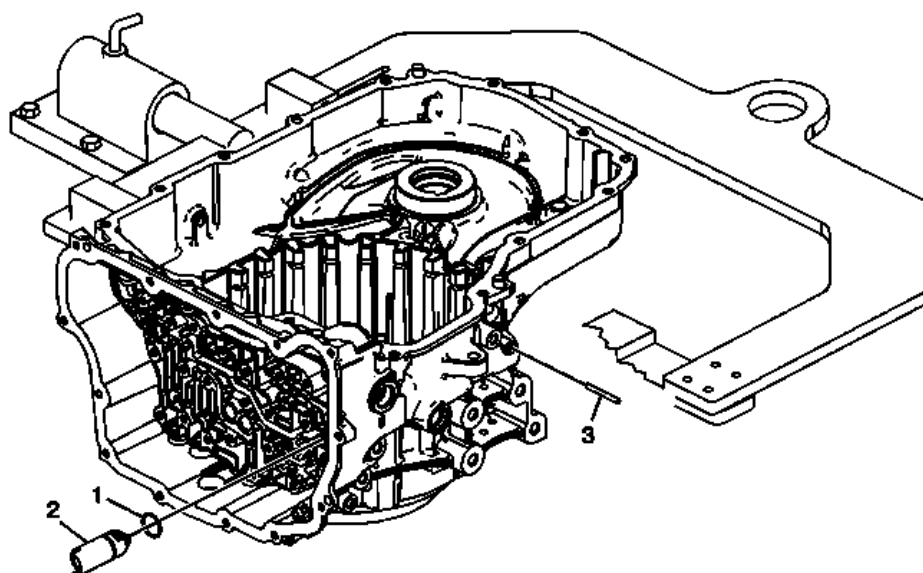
View Of Park Pawl Actuator Guide & Seal
